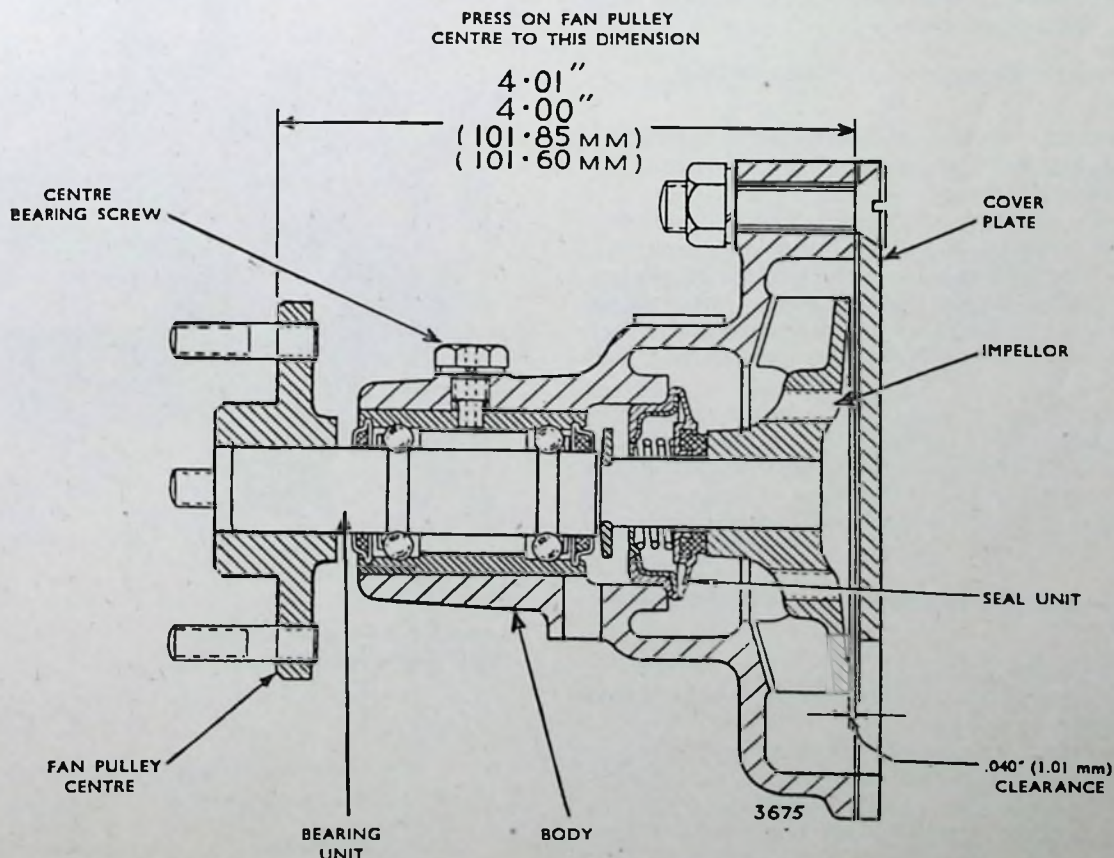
The water pump assembly. (Series IIA-III-III A.)
